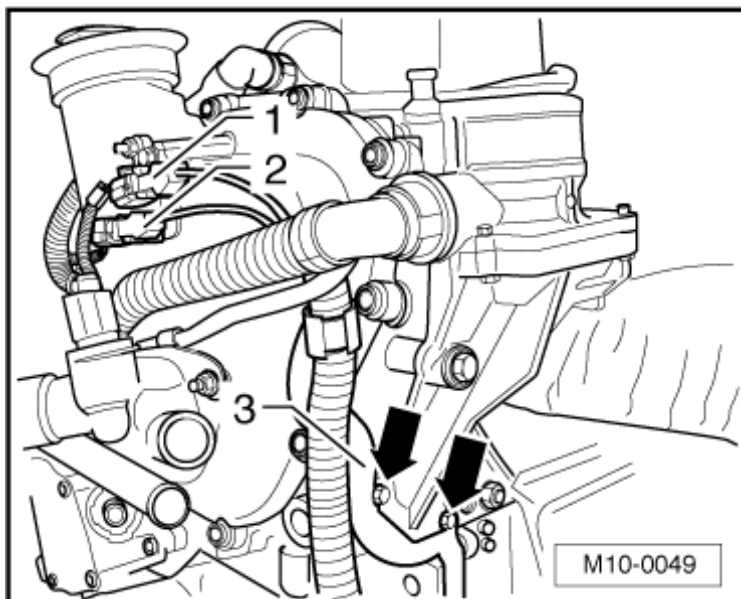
Disconnecting Harness Connectors And & Removing Bracket
